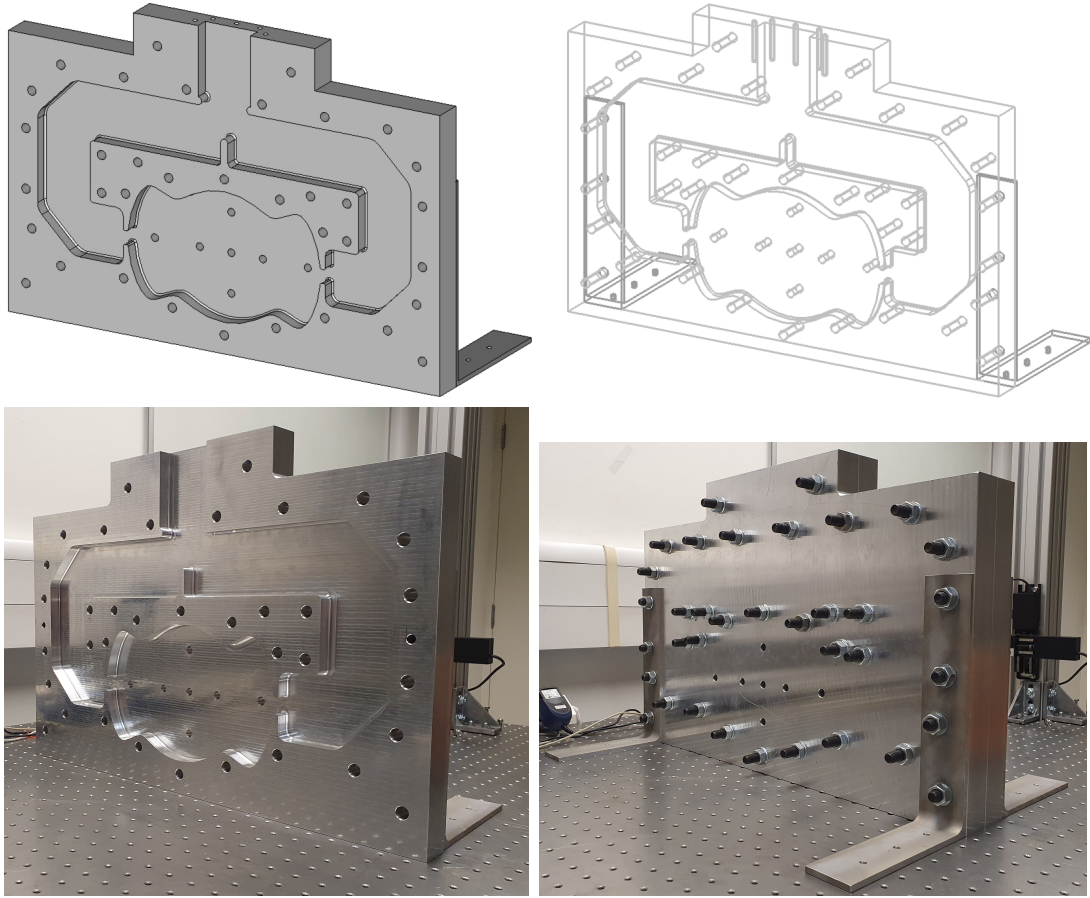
One half of the final design in a CAD material view (top-left), a CAD wireframe view (top-right), when machined (bottom-left) and when the two halves are sealed together (bottom-right).
